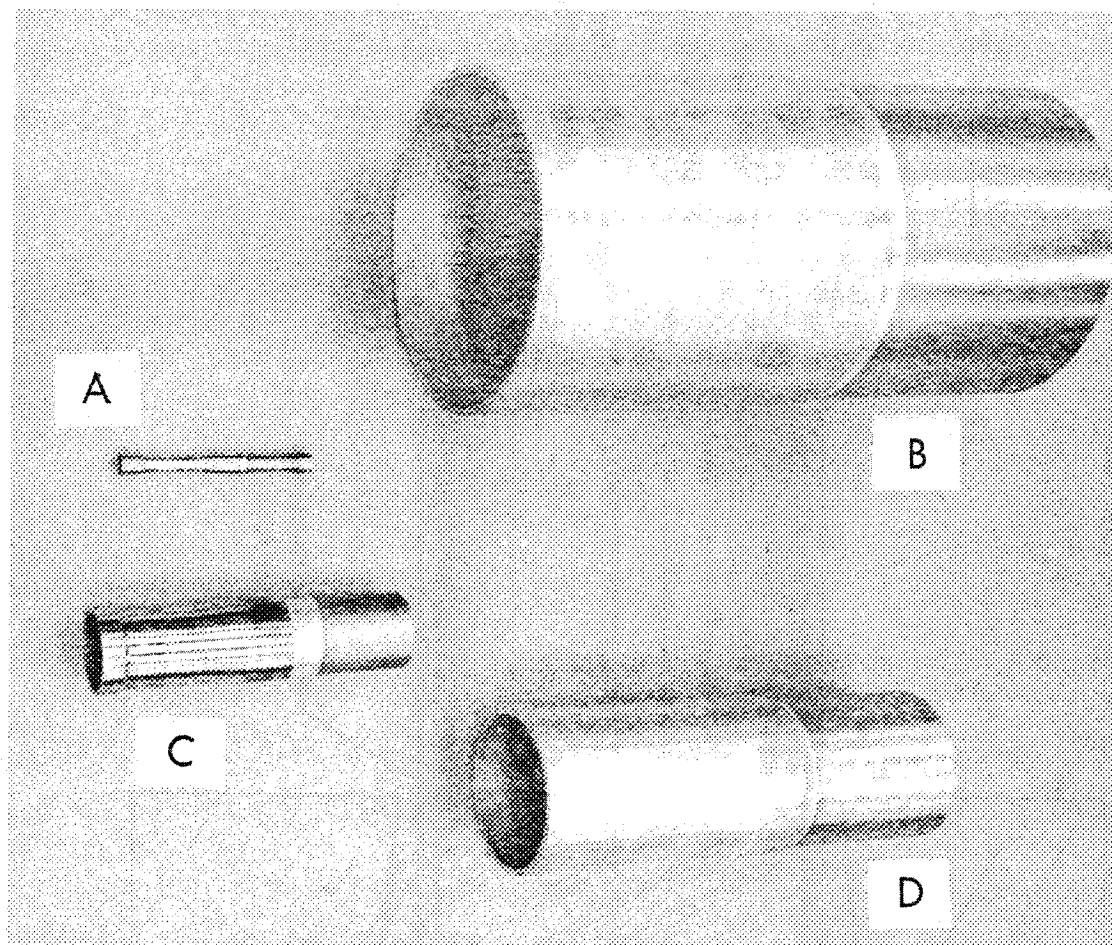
JOINT AND TOOLING ARRANGEMENT FOR DIFFUSION WELDING DISSIMILAR METAL TUBULAR ASSEMBLIES (0.50 Inch Dia.)
